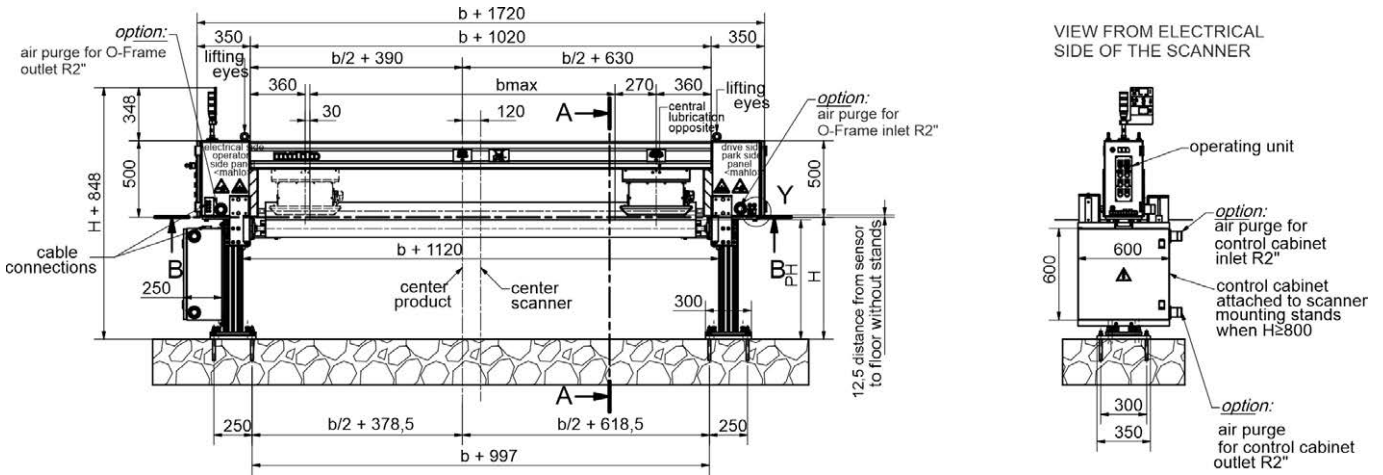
Uniscan XS-II Dimensioned drawing (Detail 91-021000-01)
